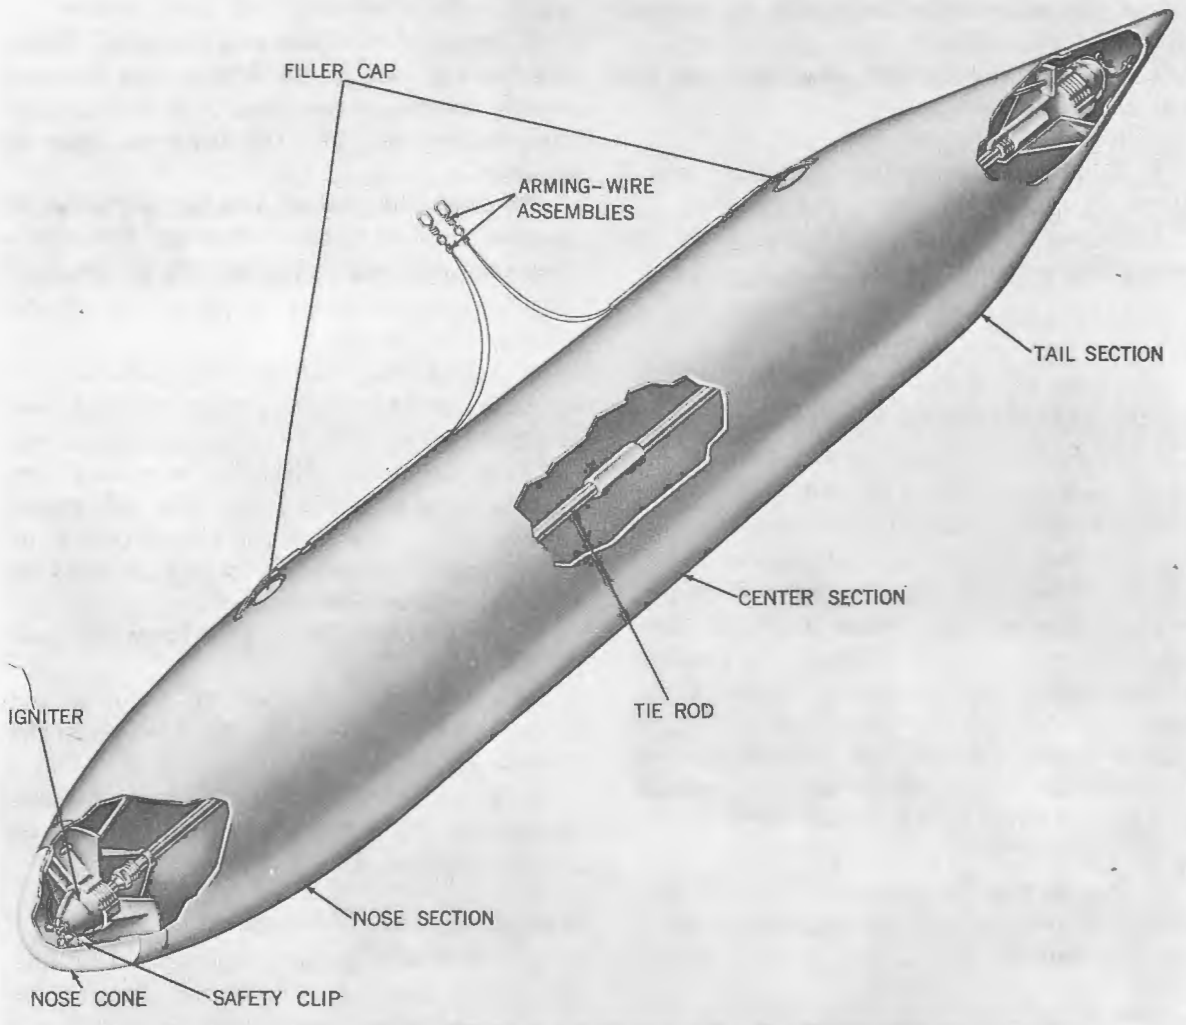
750-lb Fire Bomb Mk 77 Mod 0, Cutaway View.
